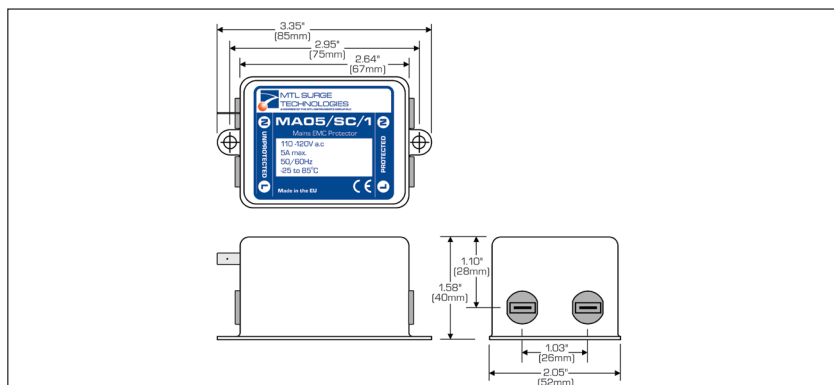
Dimensions and mounting — MA05/SC and MA10/SC
